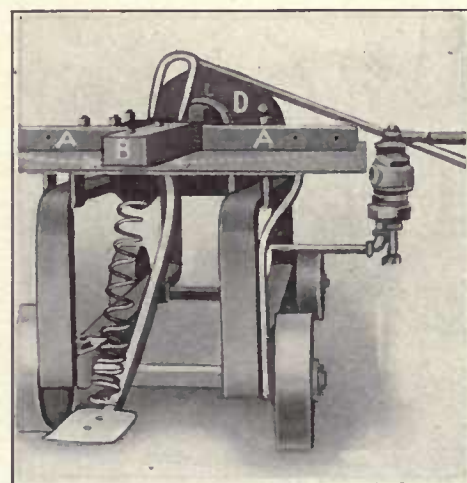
Portable Air-Operated Bending Machine for Small Work.
